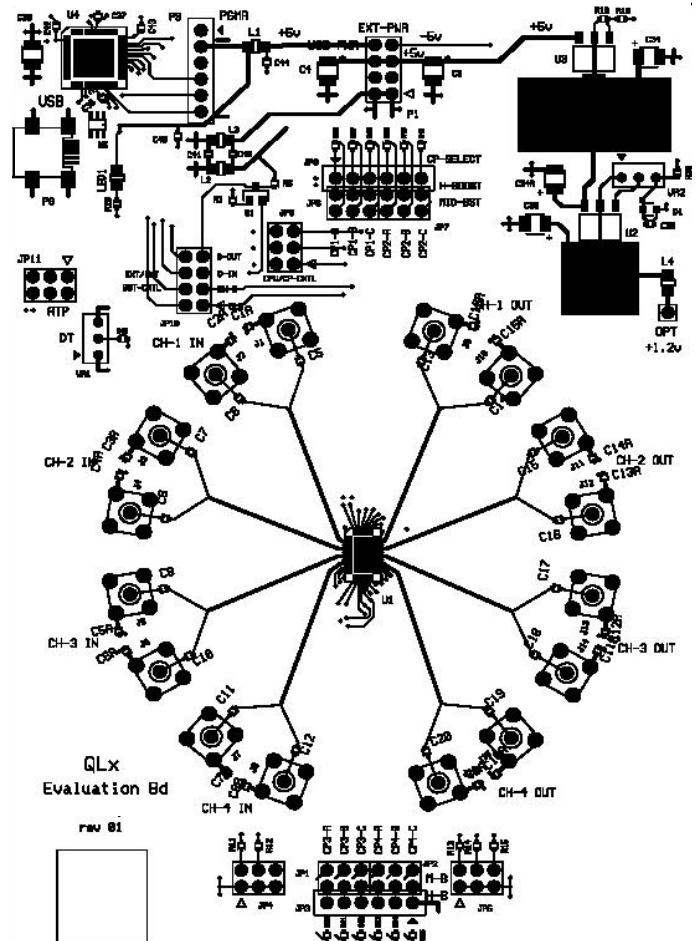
QLx4600-SL30 EVALUATION BOARD PCB
